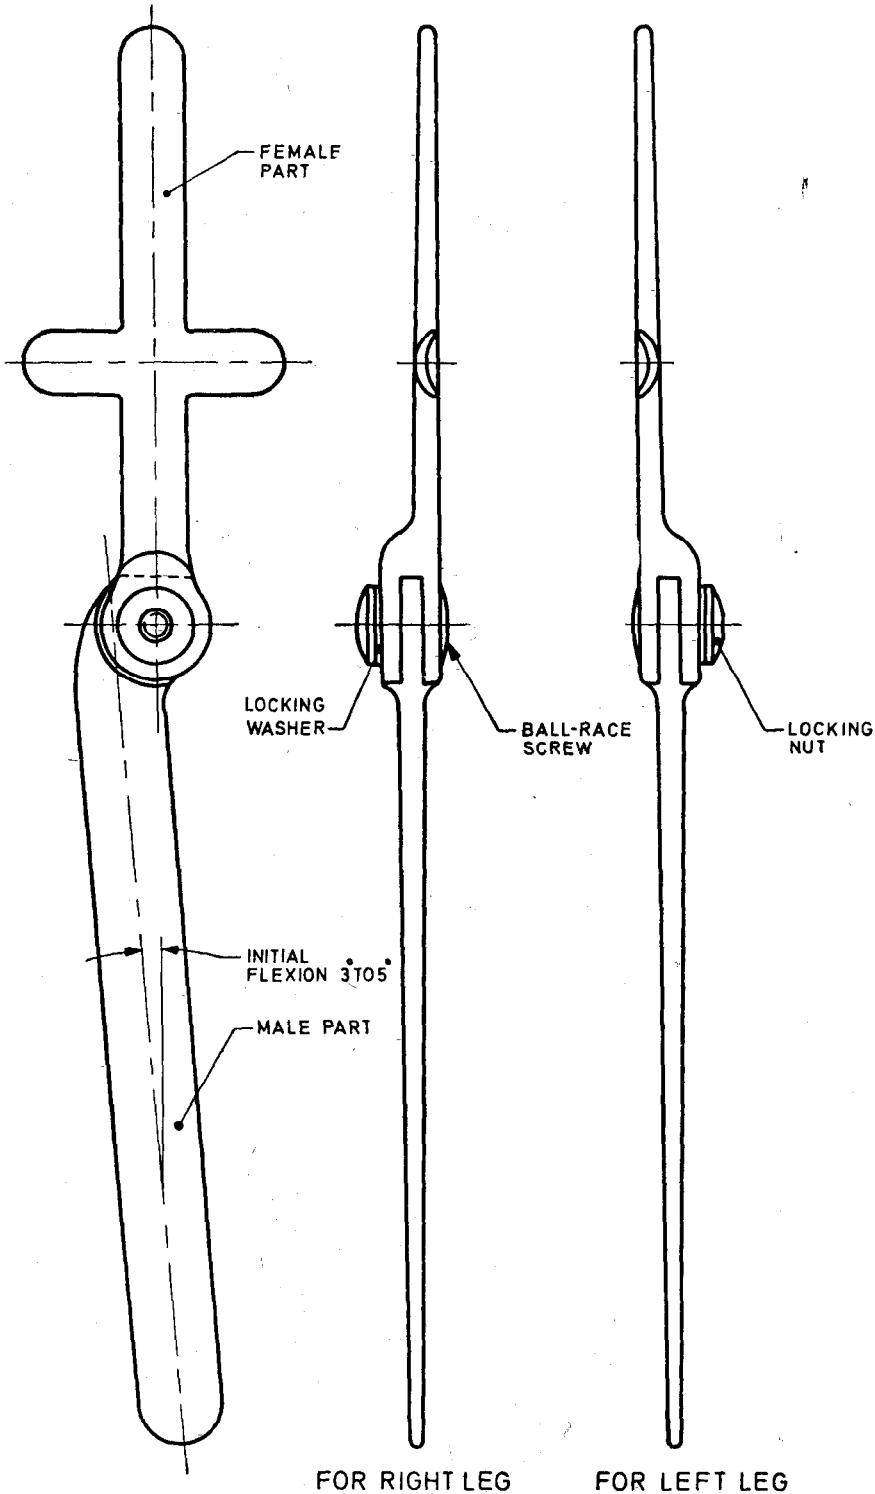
ASSEMBLY OF CRUCIFORM BELOW-KNEE JOINT
